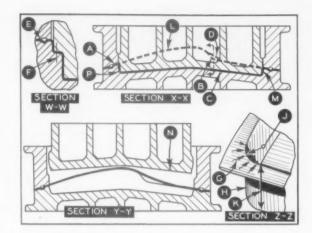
The door inner draw die illustrates a condition where the outside flange area of the part is used largely as the binder surface.
